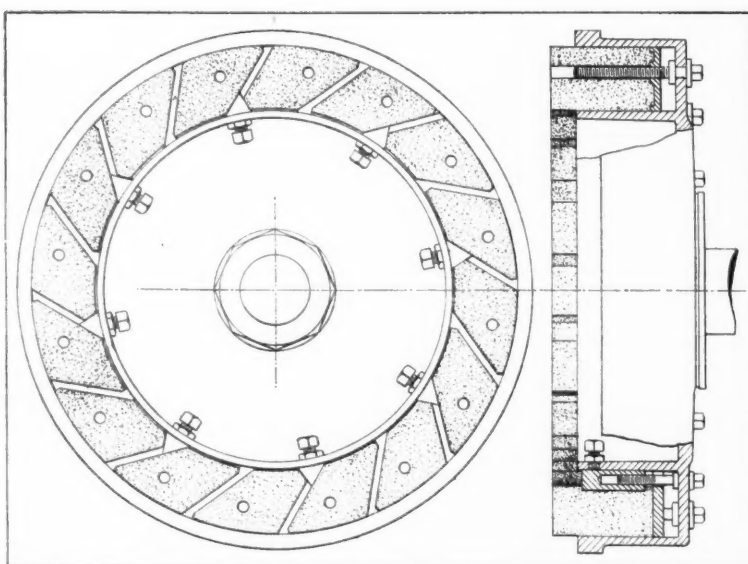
Chuck with Segments Positioned to Give Shearing Cut
